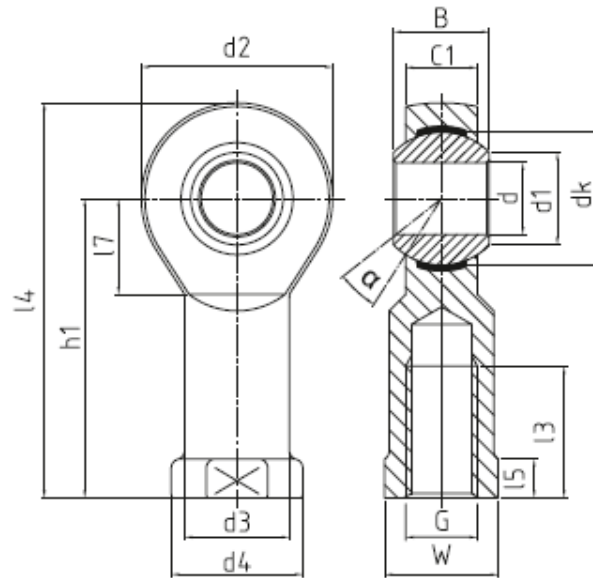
Schematic drawing for Heavy duty Spherical bearing rod end Female
